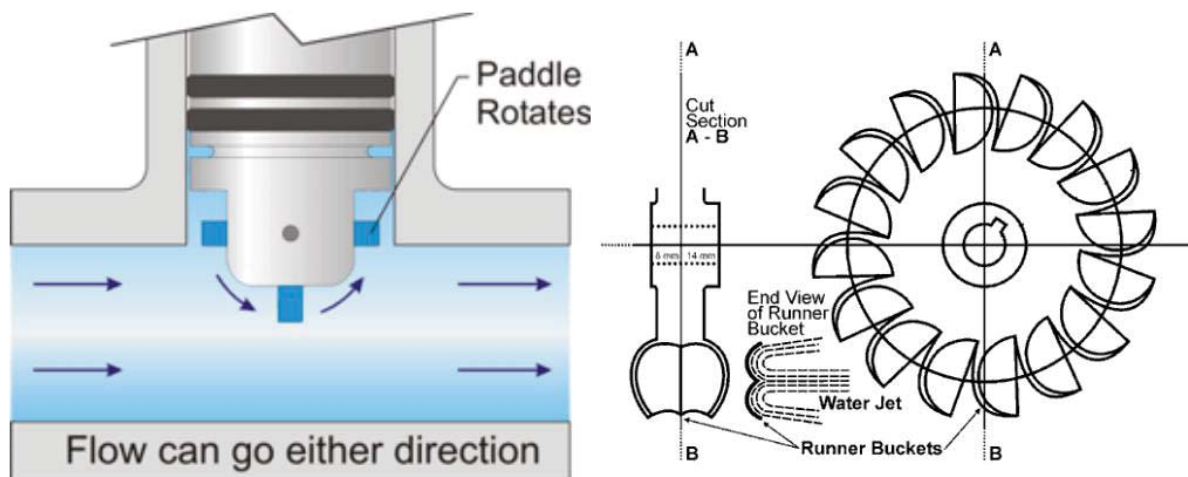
Left: Paddlewheel Meter Concept [28] Right: Example of Pelton Wheel Geometry [29]
